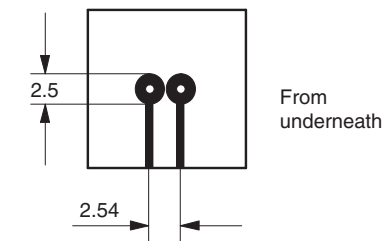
In Case of Assembly on PC Board, no Heatsink (Curve C, Figure 4)
